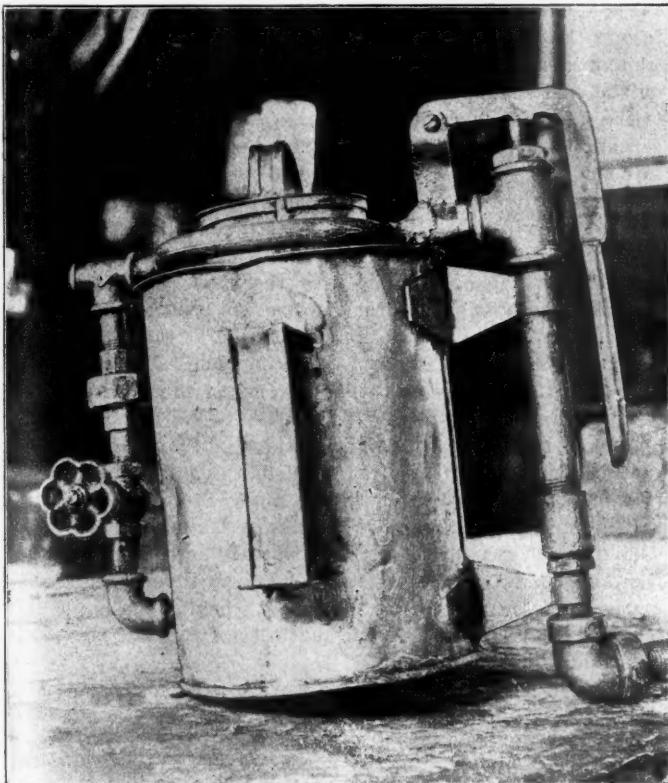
Paint Sprayer Used for Painting Freight Cars.
